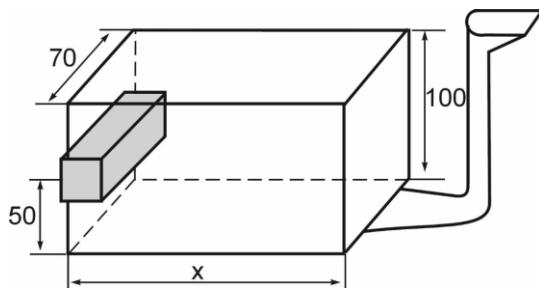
Schematic diagram for the casting - insert arrangement; $X = 160; 120; 80 \text{ mm}$
